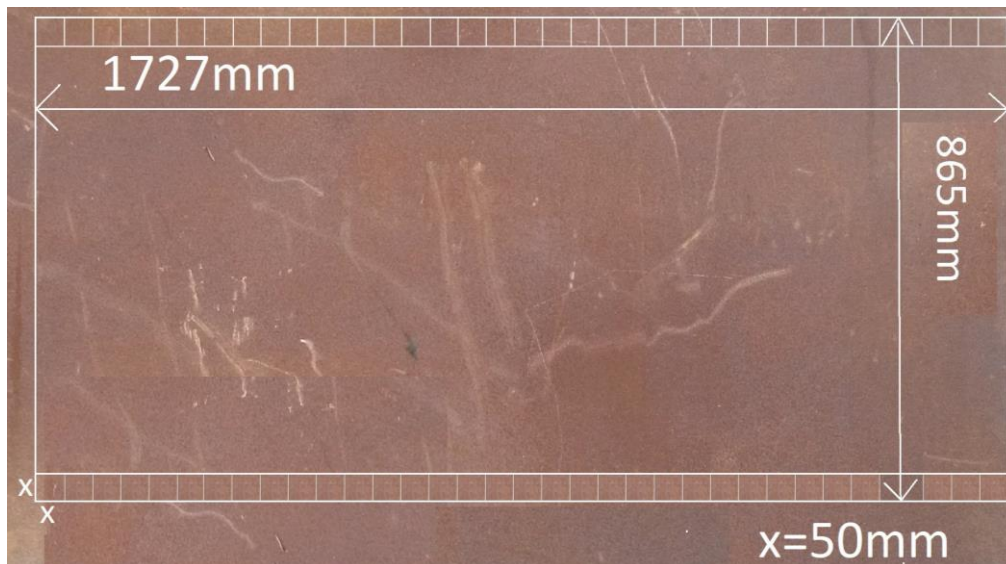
Dimensions of the metal plate of the inner cylinder used for insulation
